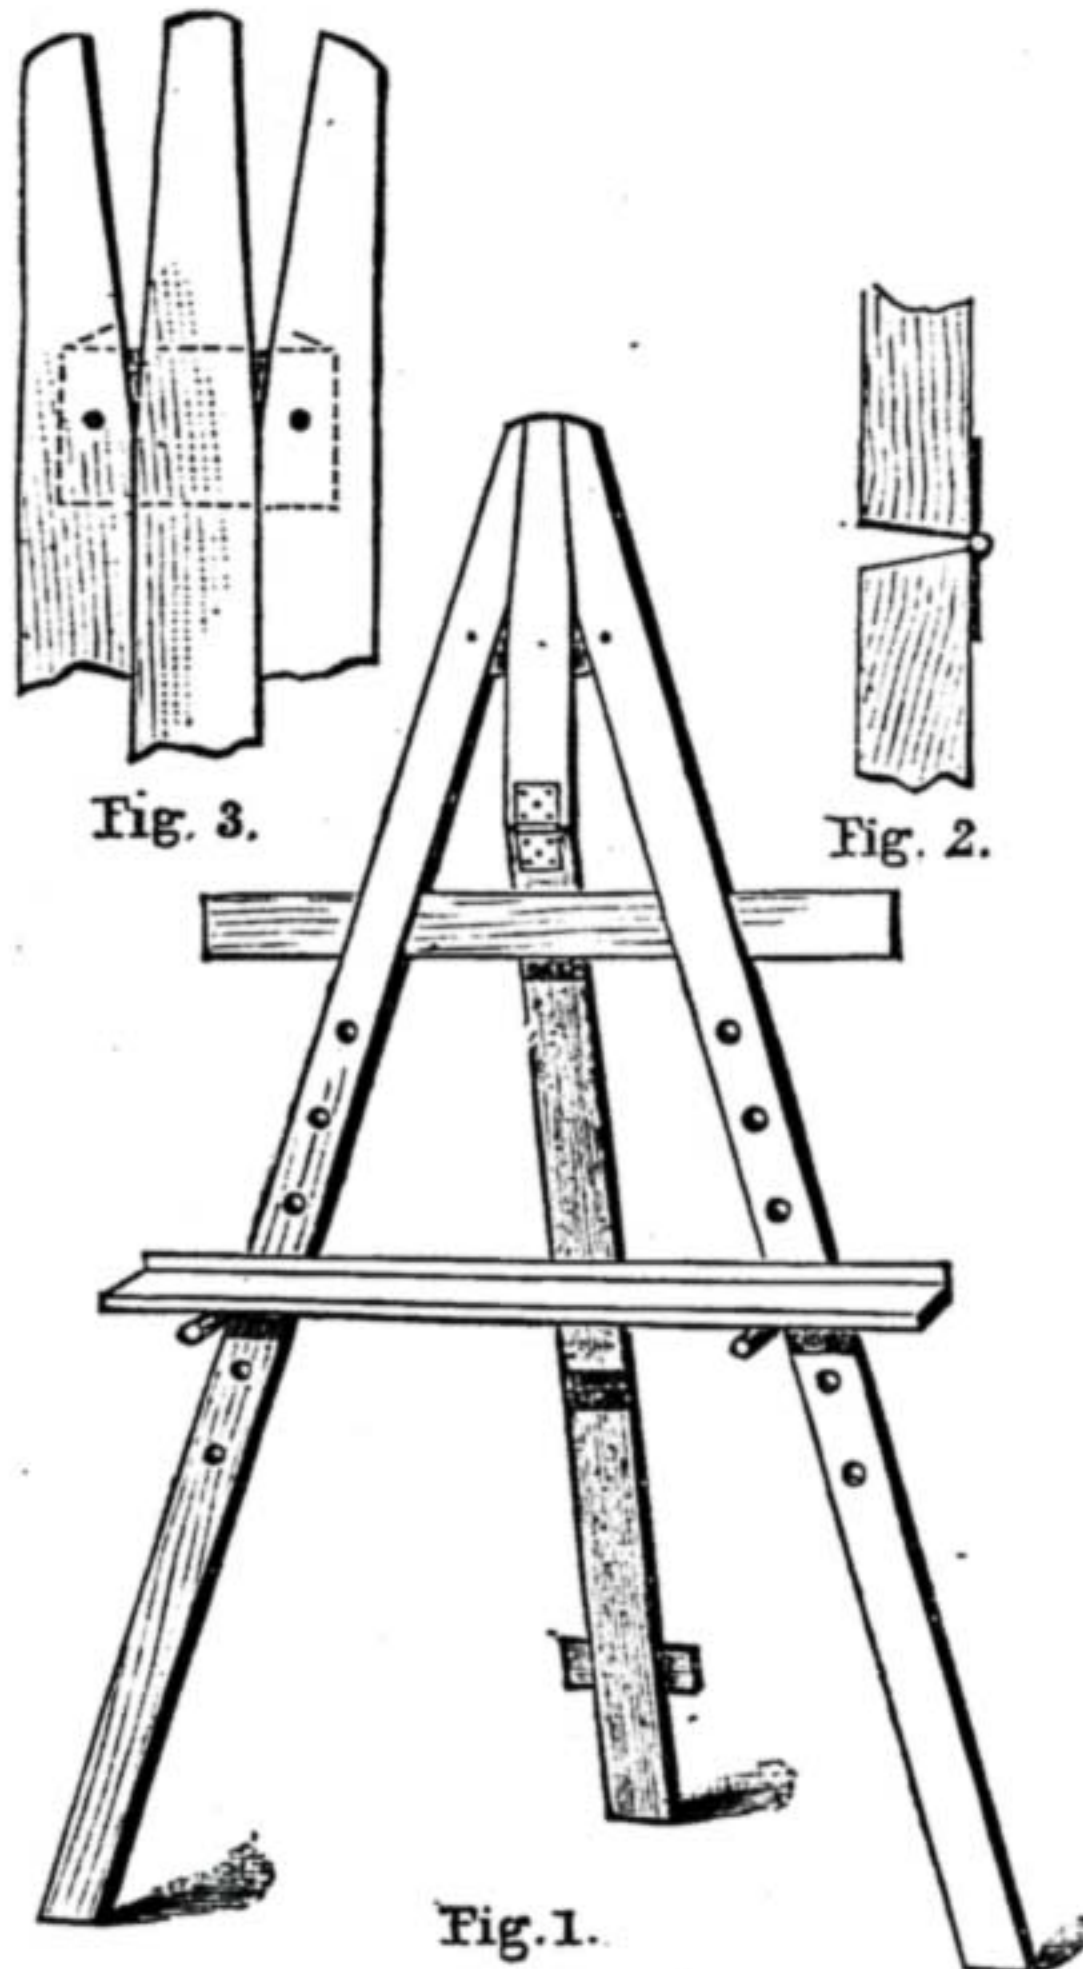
The Easel complete. Fig. 2.—Joint of Centre Leg. Fig. 3.—Hinged Attachment of Top.
